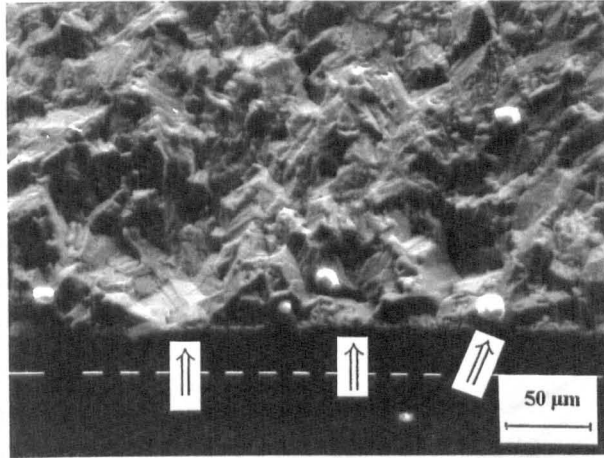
Fracture surface of a ground specimen showing crack initiation sites along a grinding mark.
